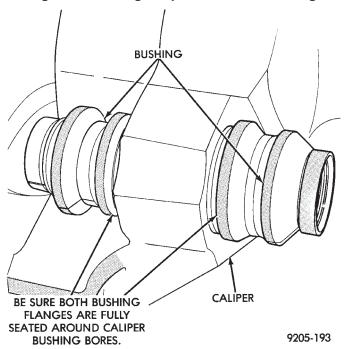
Bushing Correctly Installed In Caliper CALIPER PISTON AND SEALS
